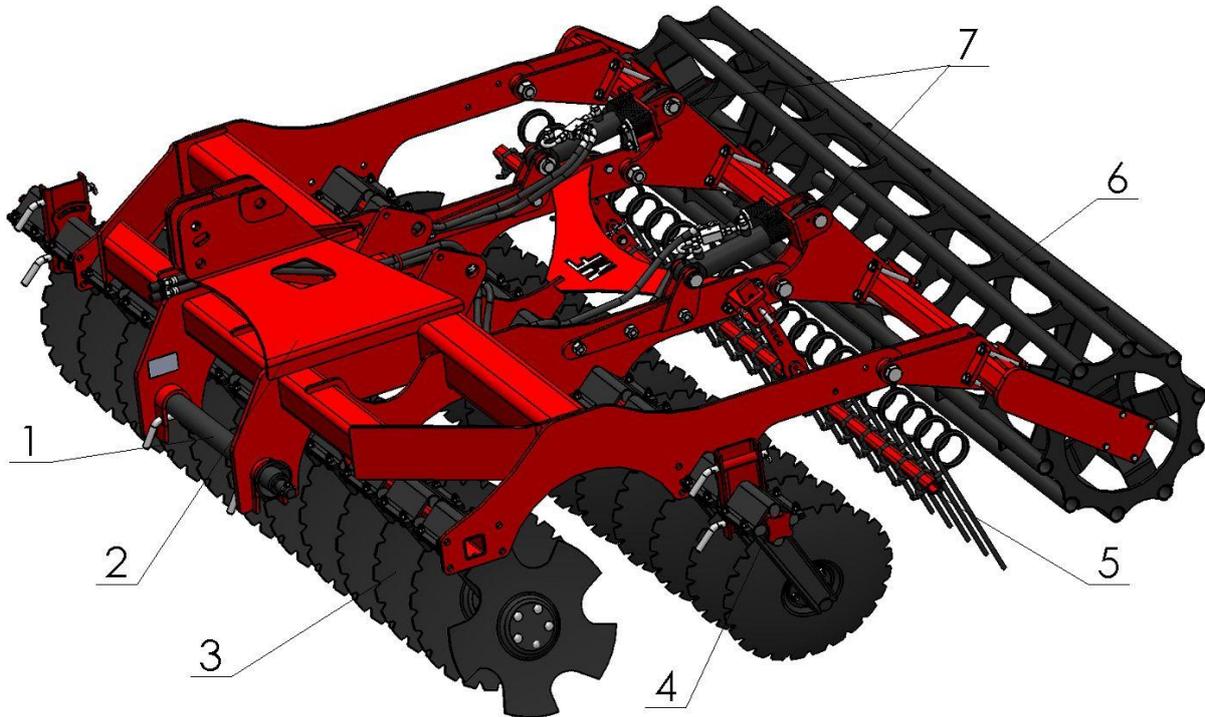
1 – Lower link beam, 2 – Unit frame, 3 – Disc cutter, 4 – Outer disc support, 5 – Scraper beam, 6 – Shaft, 7 – Working depth adjustment.
